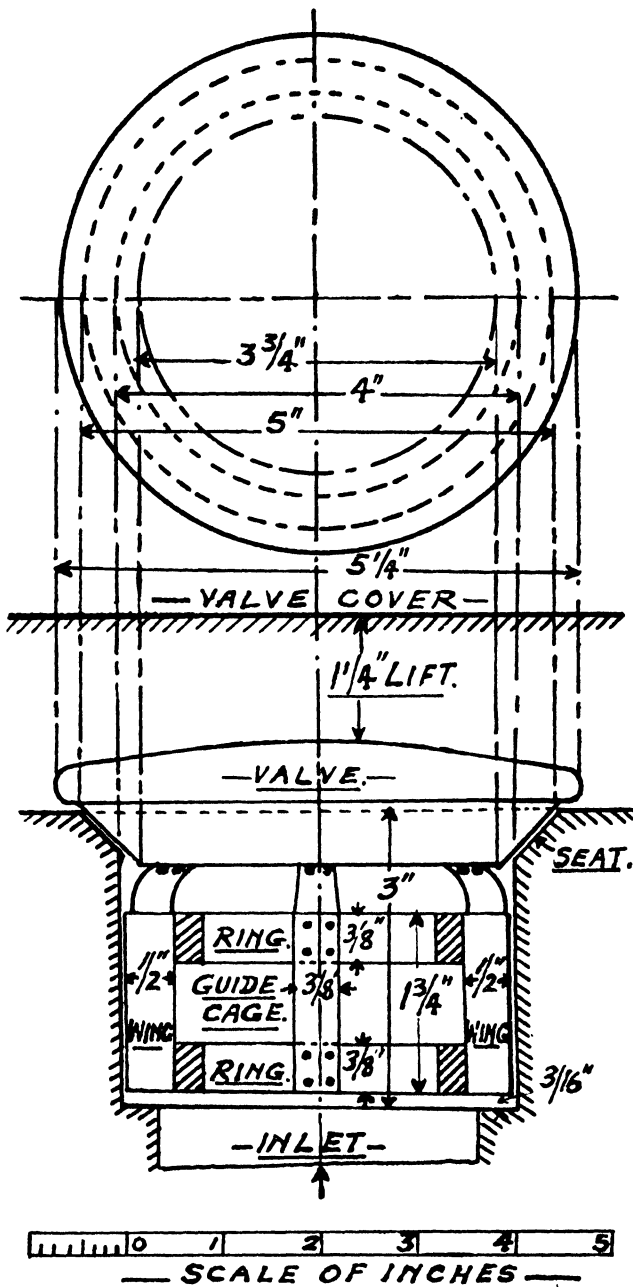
Plan and Sectional End Elevation of Mushroom Valve and Guide Cage.
